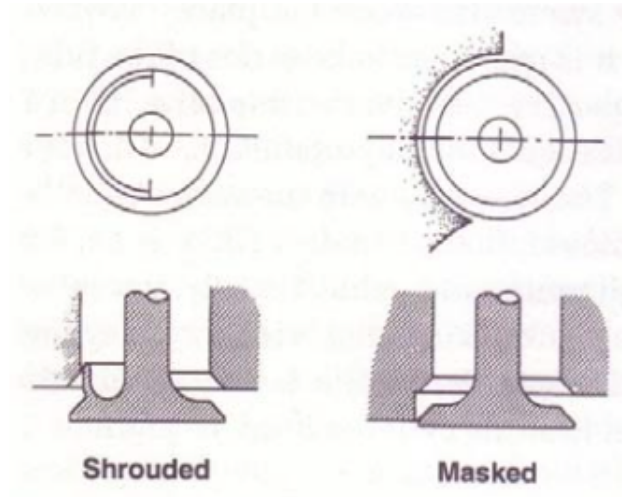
Shrouded inlet valve and masked cylinder head. From [2]
